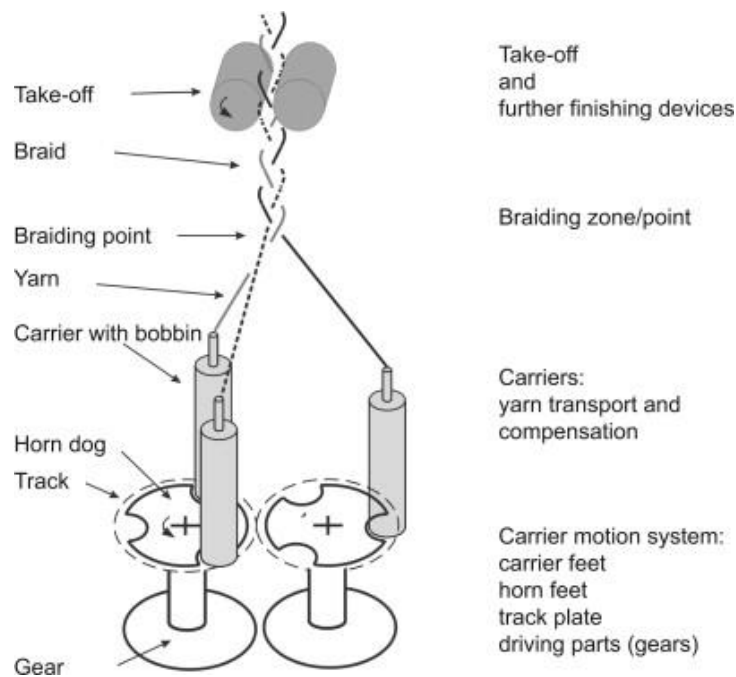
Operating diagram of a braiding machine (Kyoshev, 2015²)
